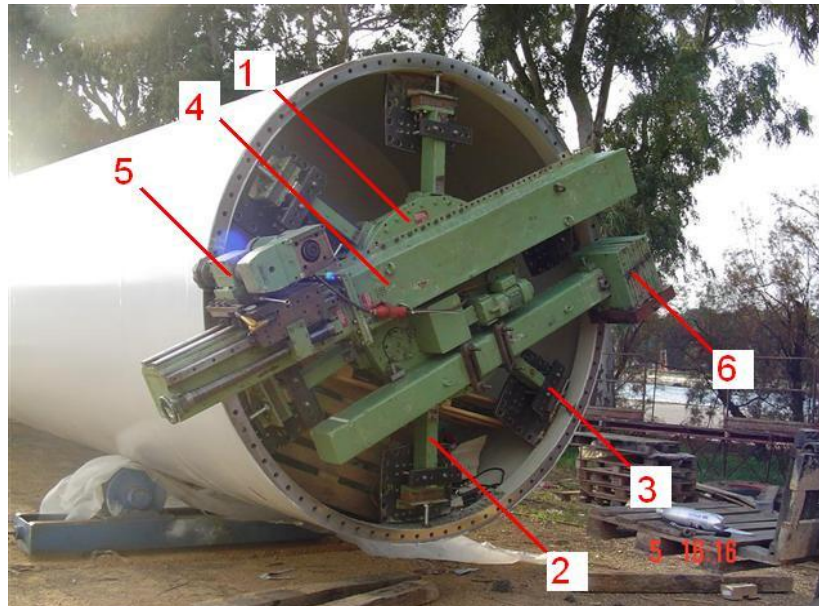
Circular mill operating vertically when mounted to an unassembled wind tower section.
